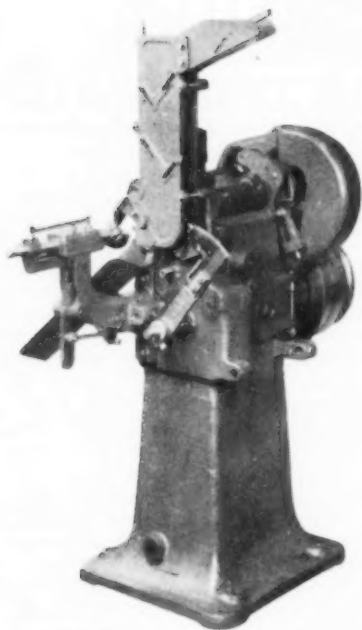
(left).—Trimming and beading machine for circular seamless boxes
